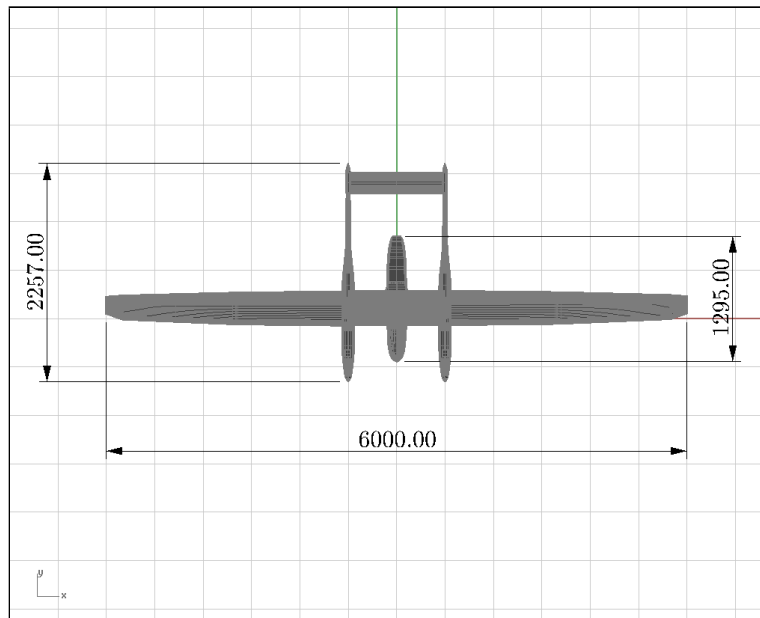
Top view of the CSIR's Modular UAS (dimensions in millimeters).
